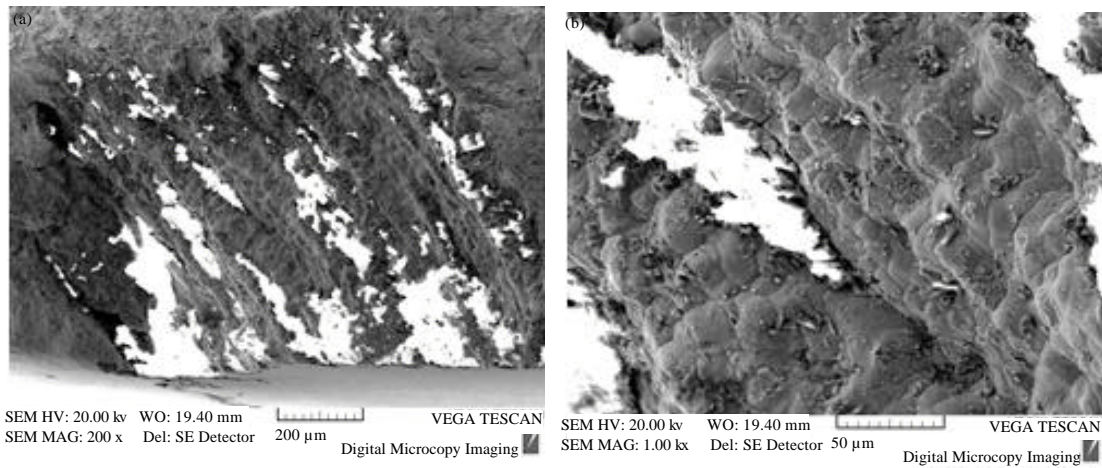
(a-b): Morphology of cracking fracture under SEM, (a) Overall morphology and (b) Local zone morphology
